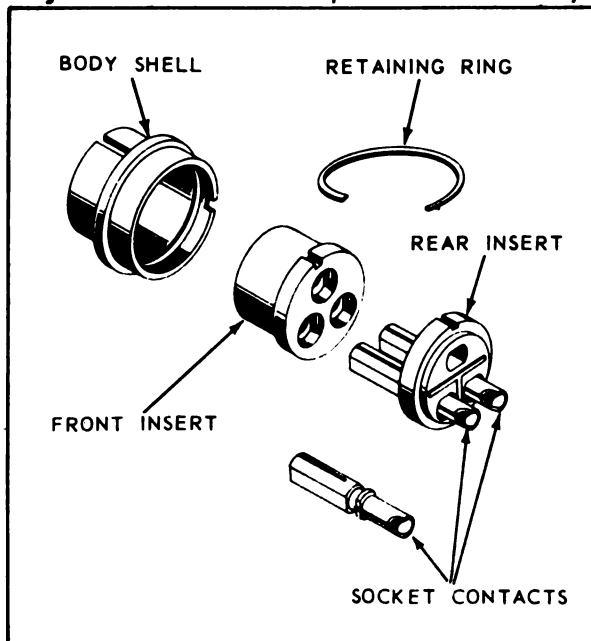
Amphenol Contact and Insert Assembly - Exploded View
